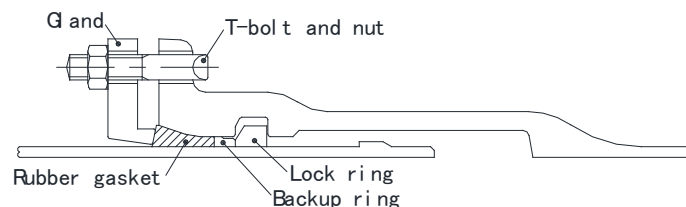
Joint structure of Type NS pipe joint (DN500~1000) (Source: JDPA)
